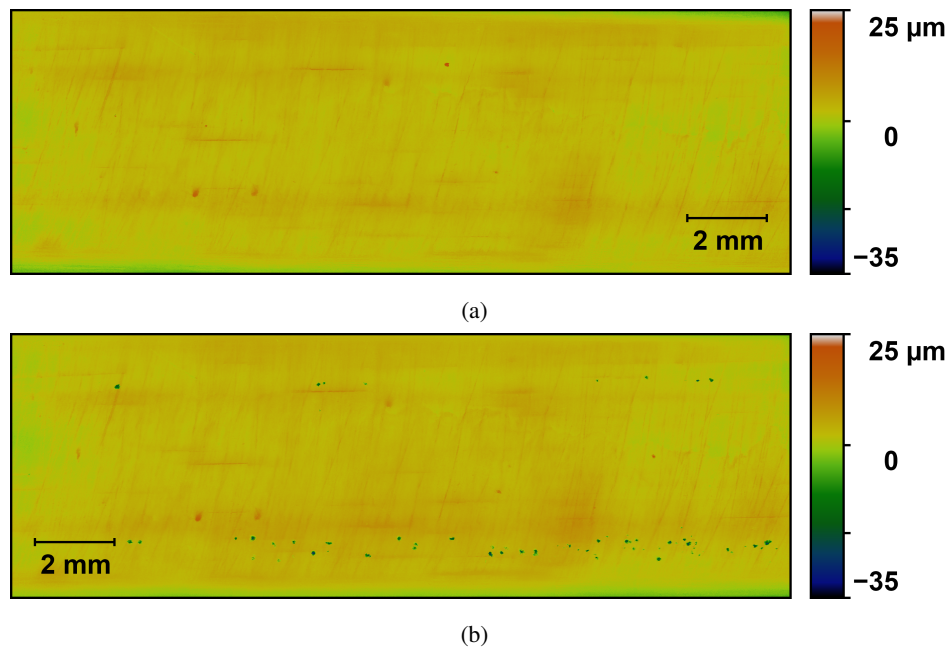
WLI surface maps of the (a) uncorroded and (b) corroded surfaces of the root of the 1.6 mm bare specimen. The top of these images is the RS, the bottom of these images is the AS, with the welding tool having travelled from left to right.
